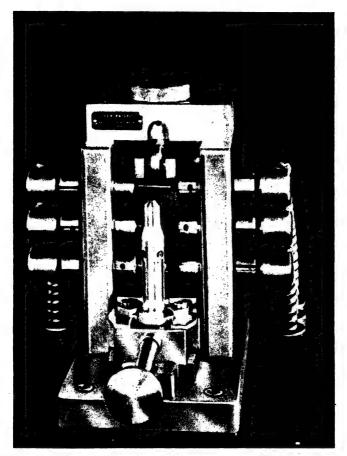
Close-up View of a Multiple Gauging Head for 20 mm Cannon Shell
